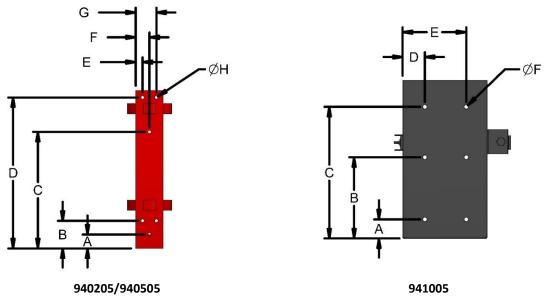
Cylinder Mounting Bracket Bolt Pattern
